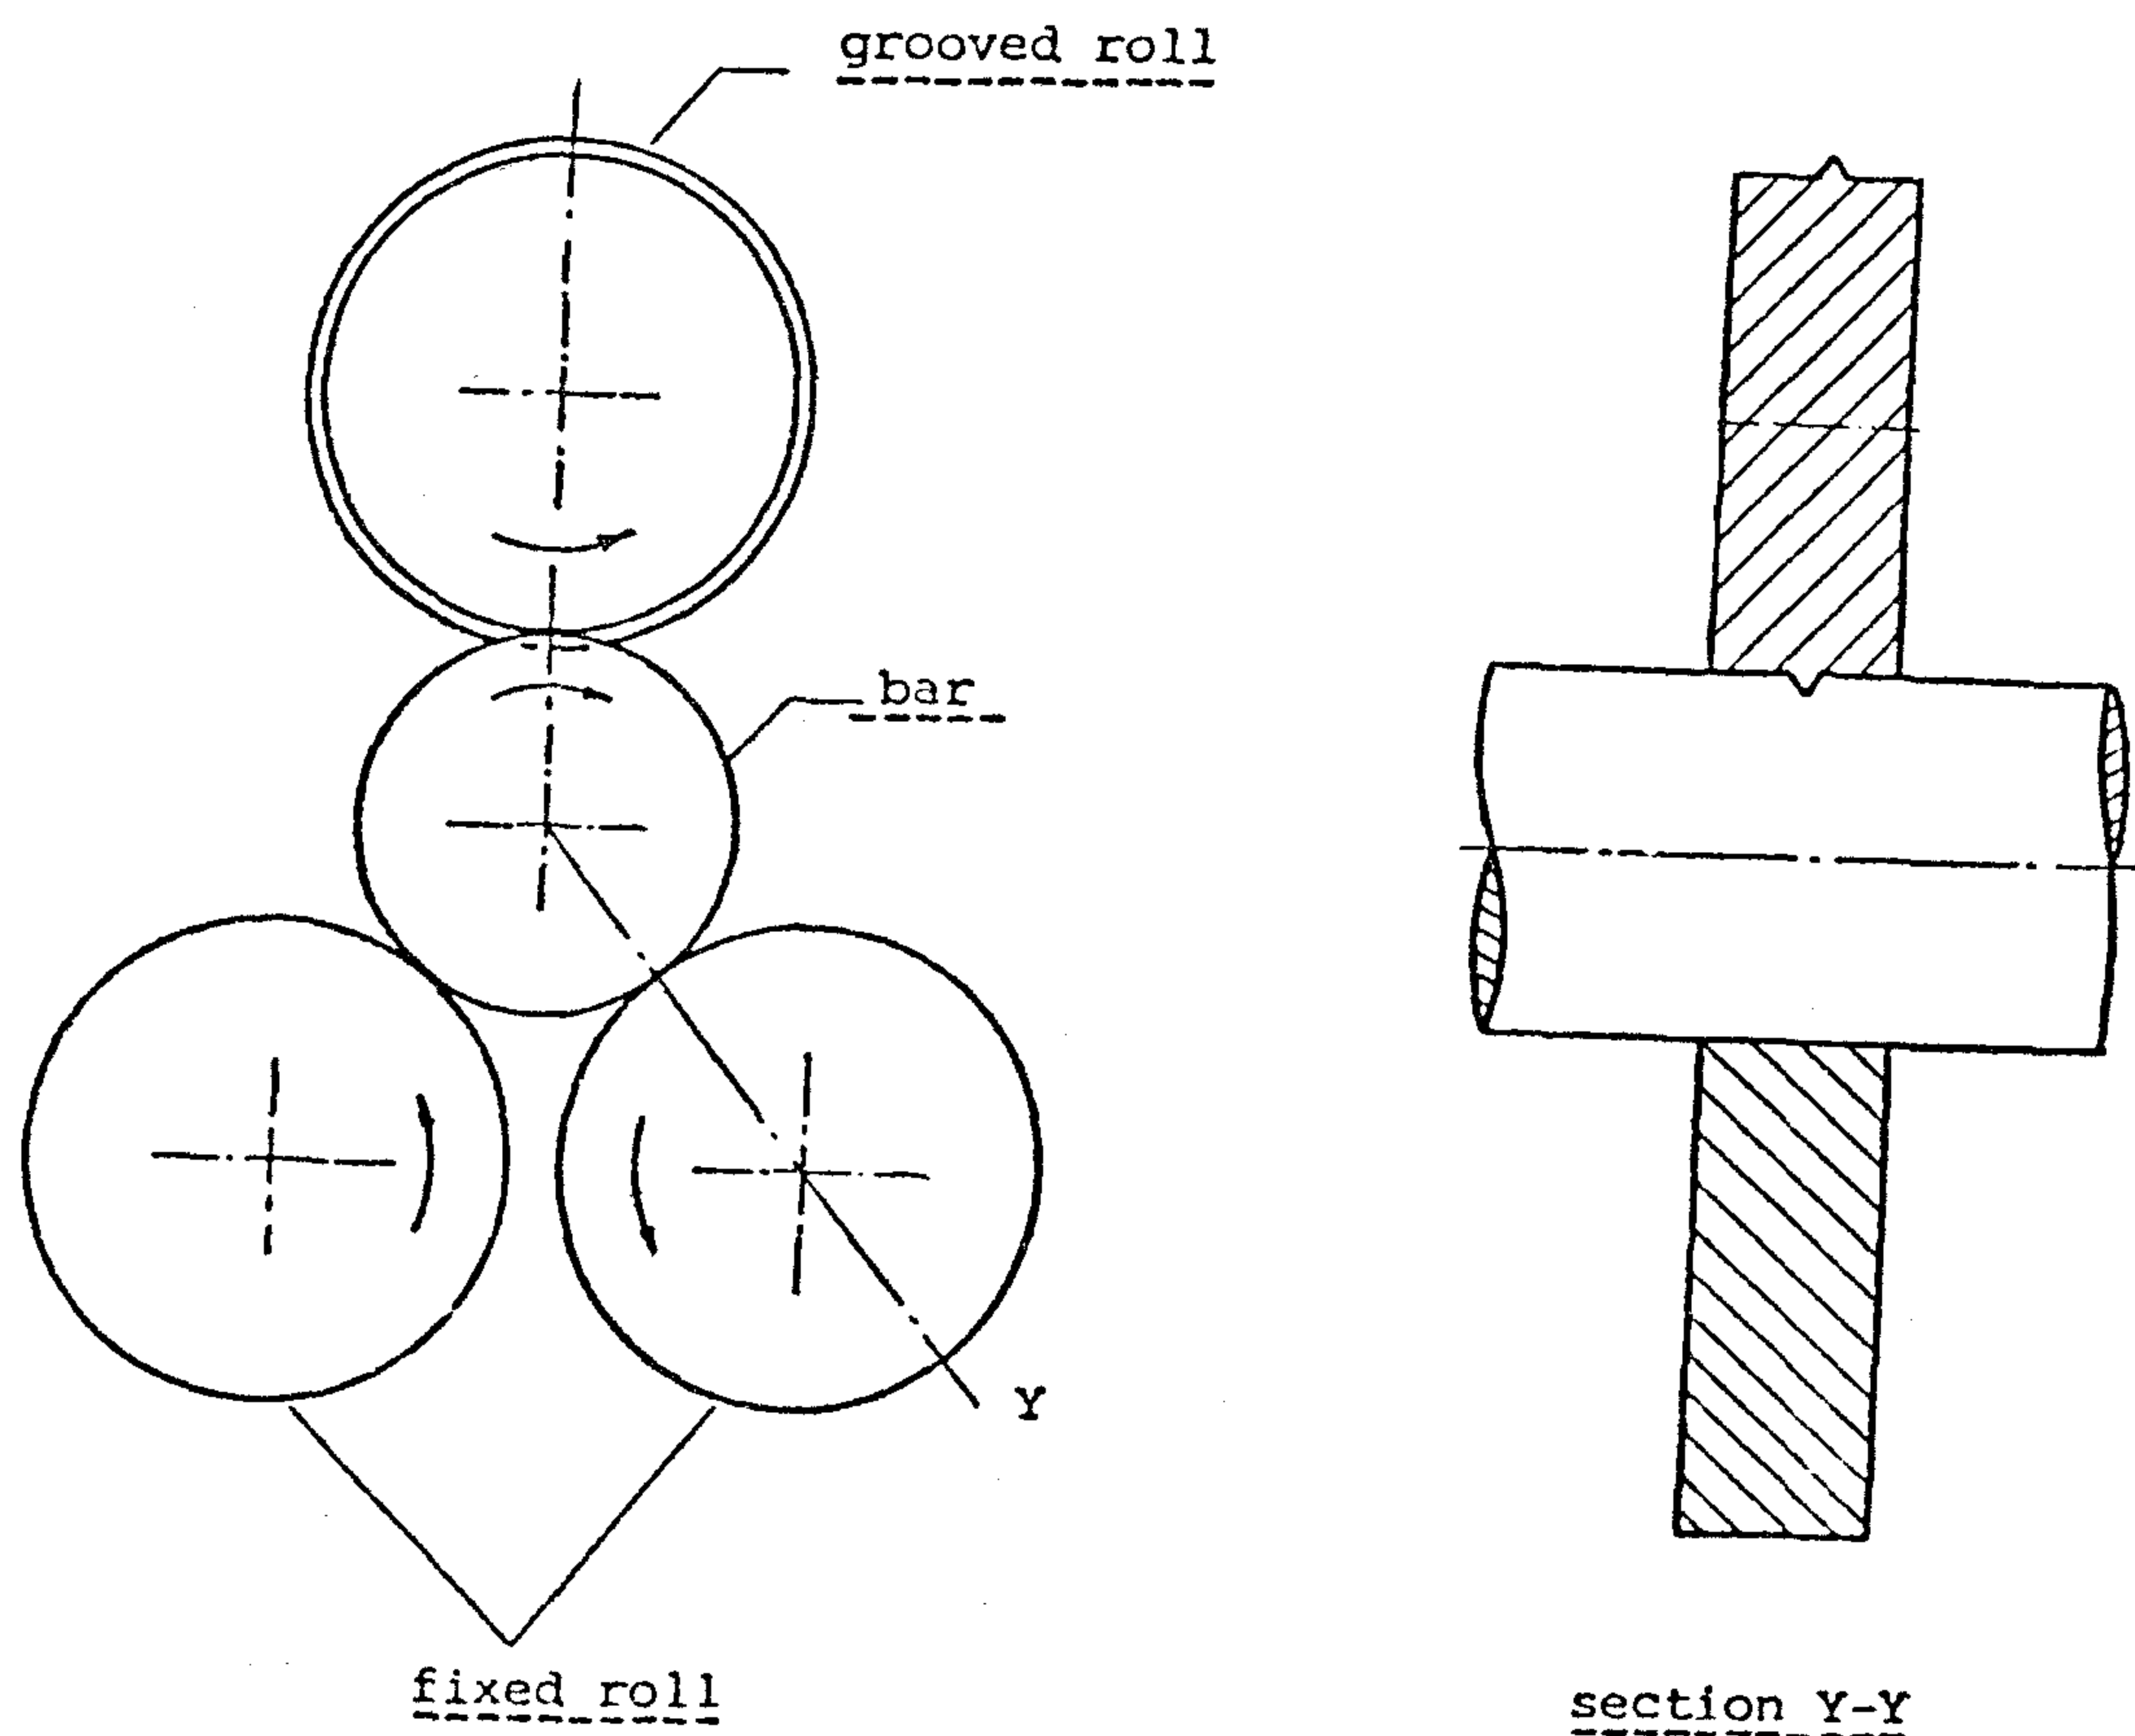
An end and sectional view of bar grooving using three roller arrangement
